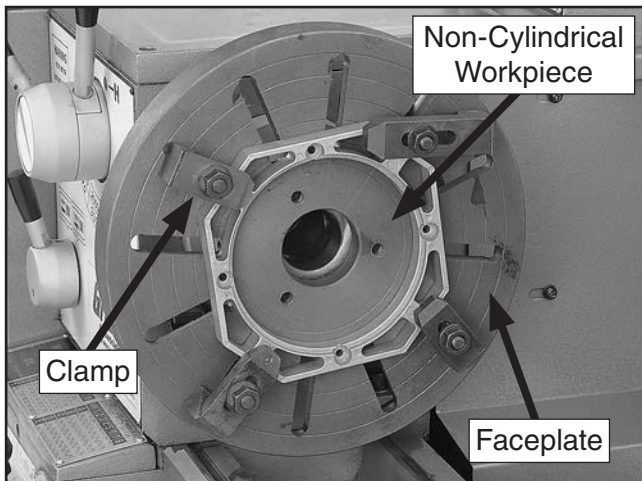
Example of a non-cylindrical workpiece mounted on the faceplate.
